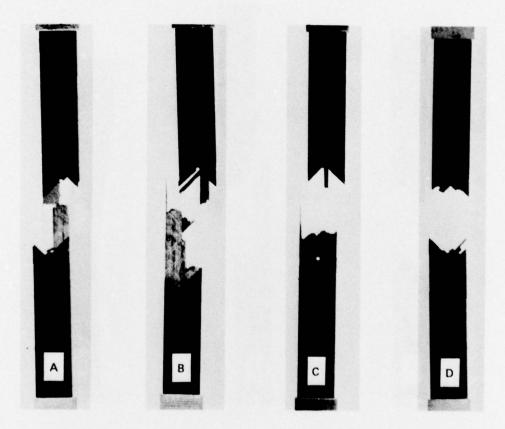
Fatigue failures of multi-directional 0 ± 45° CFC containing a 2mm diameter hole. Specimens were preconditioned for 3000 hours at 40°C and 95% RH and their endurances to failure were; specimen (A) 2644100, (B) 1234500, (C) 810100 cycles, (D) failed on run-up to full load
